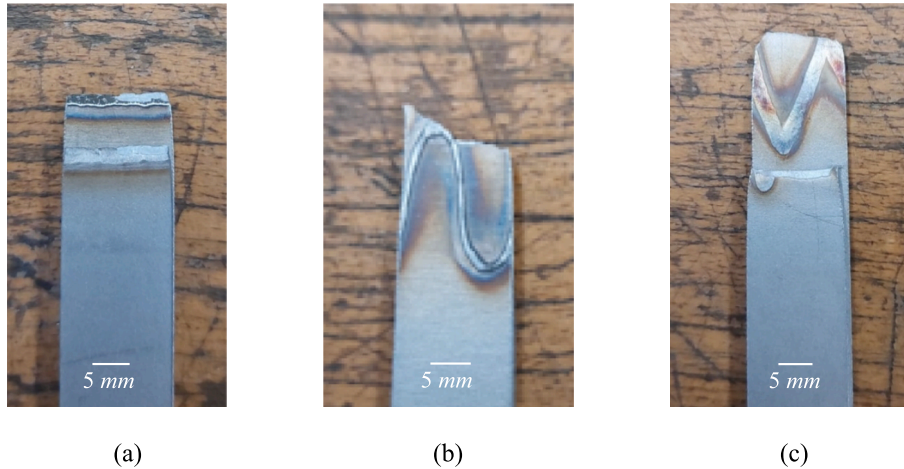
Raptured surface of the various butt weld patterns: (a) linear, (b) bio-inspired: sawtooth (c) bio-inspired: sinusoidal.
